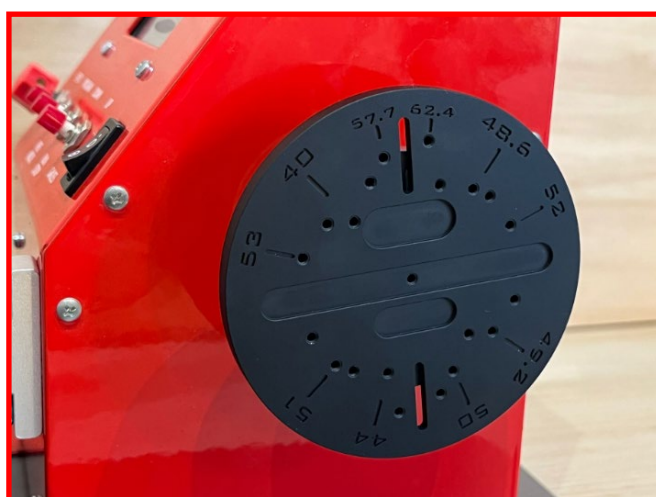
Plate to install the coils (Optional for Mojotone winders)
